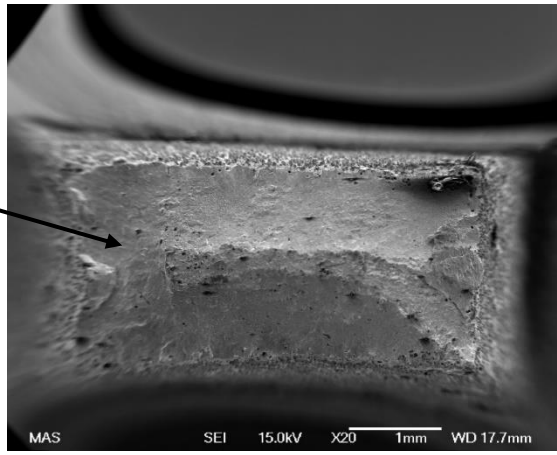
85 B10 HT1 x20 Fracture Surface
